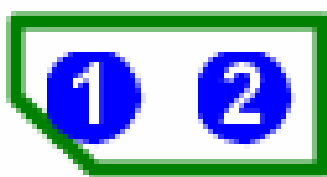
Typical Jumper Pad Numbering Scheme (removable jumpers)
